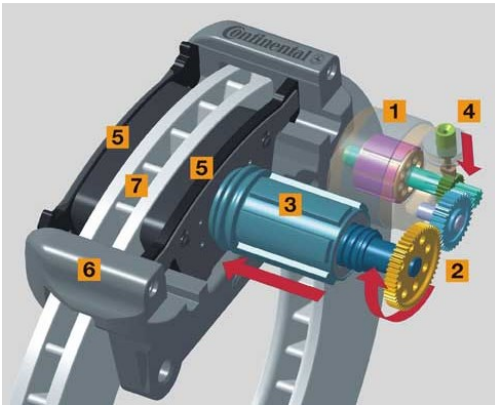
Concept and components of an electromechanical disc brake²⁷; 1: electric motor, 2: gearing, 3: spindle, 4: parking brake lock, 5: brake pads, 6: caliper, 7: brake disc
